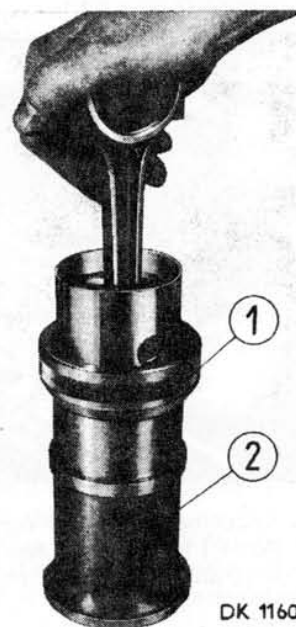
/8 - Fitting Piston into Cylinder Liner Using the Pilot Ring
